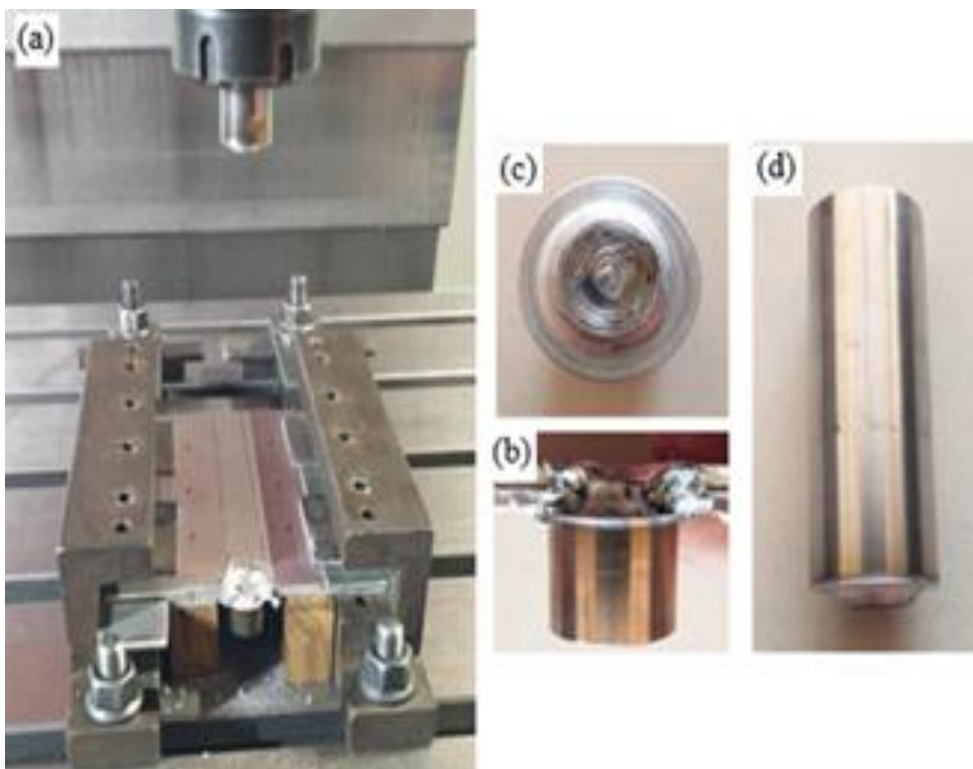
Experiment-1, after tool-1 was broken, (a) experiment setup, (b) view of bottom shoulder, (c) Top view of bottom shoulder, (d) Top shoulder with shank
